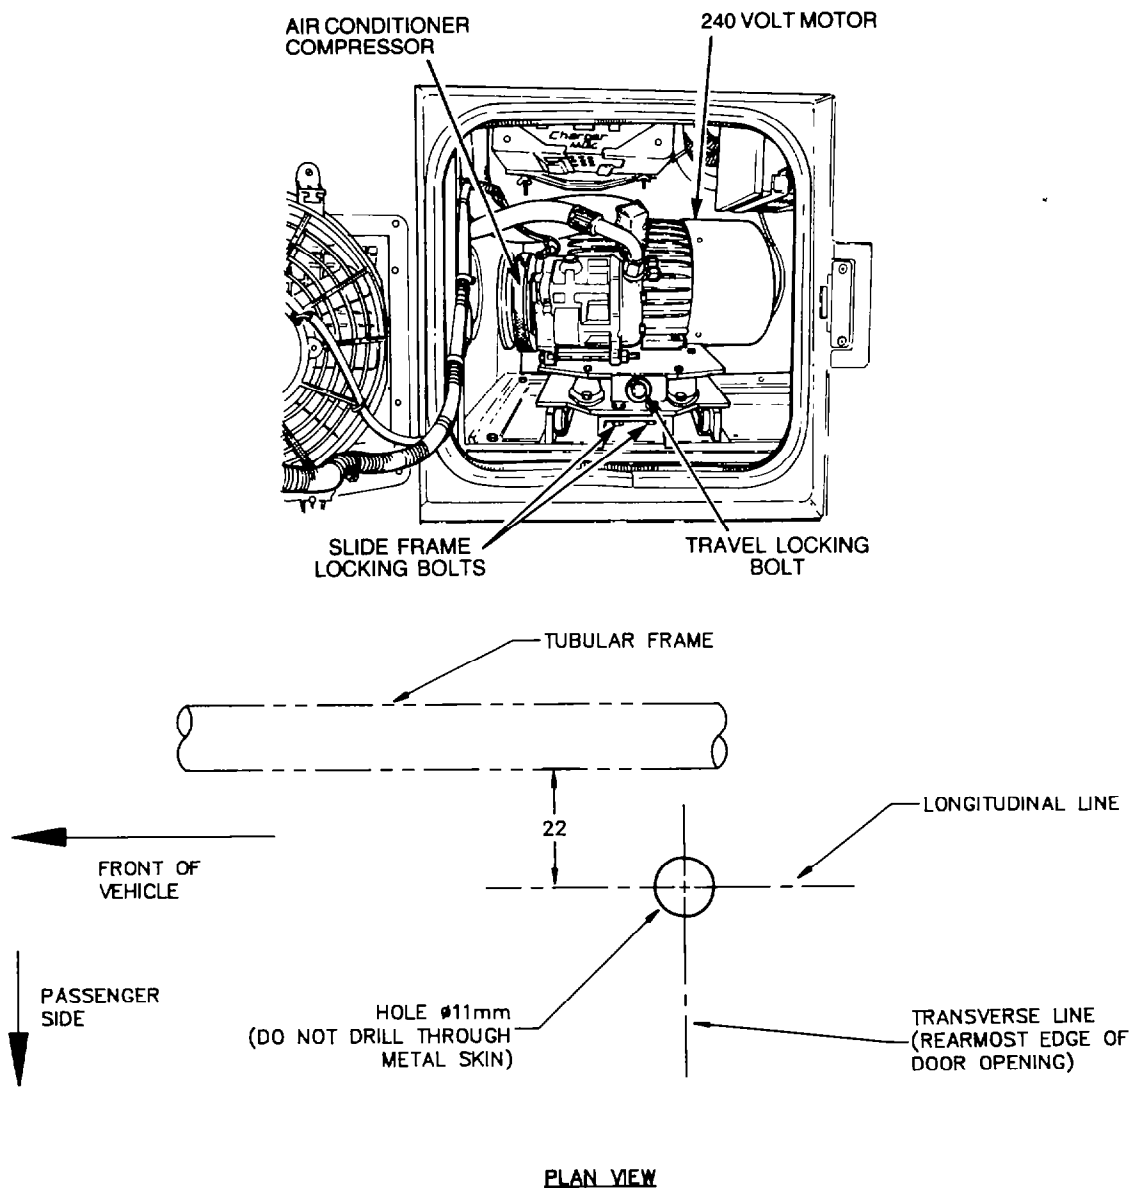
Location of Travel Locking Bolt and Storage Hole
